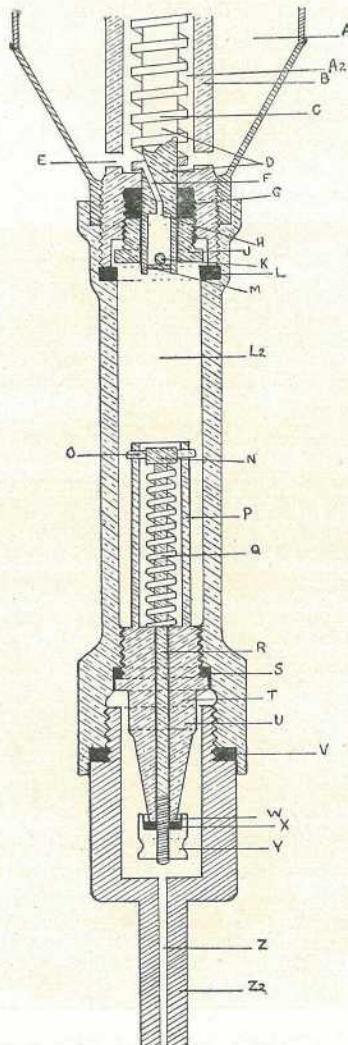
Internal mechanism of Danks' Hand-Injector, showing positions of washers, springs, valves, delivery passage, &c.
